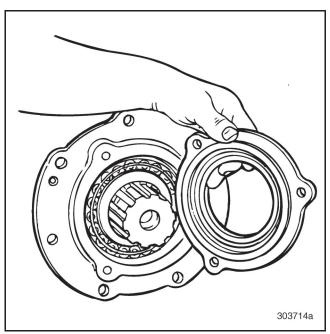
Installing Rear-Drive Shaft Seal Housing
